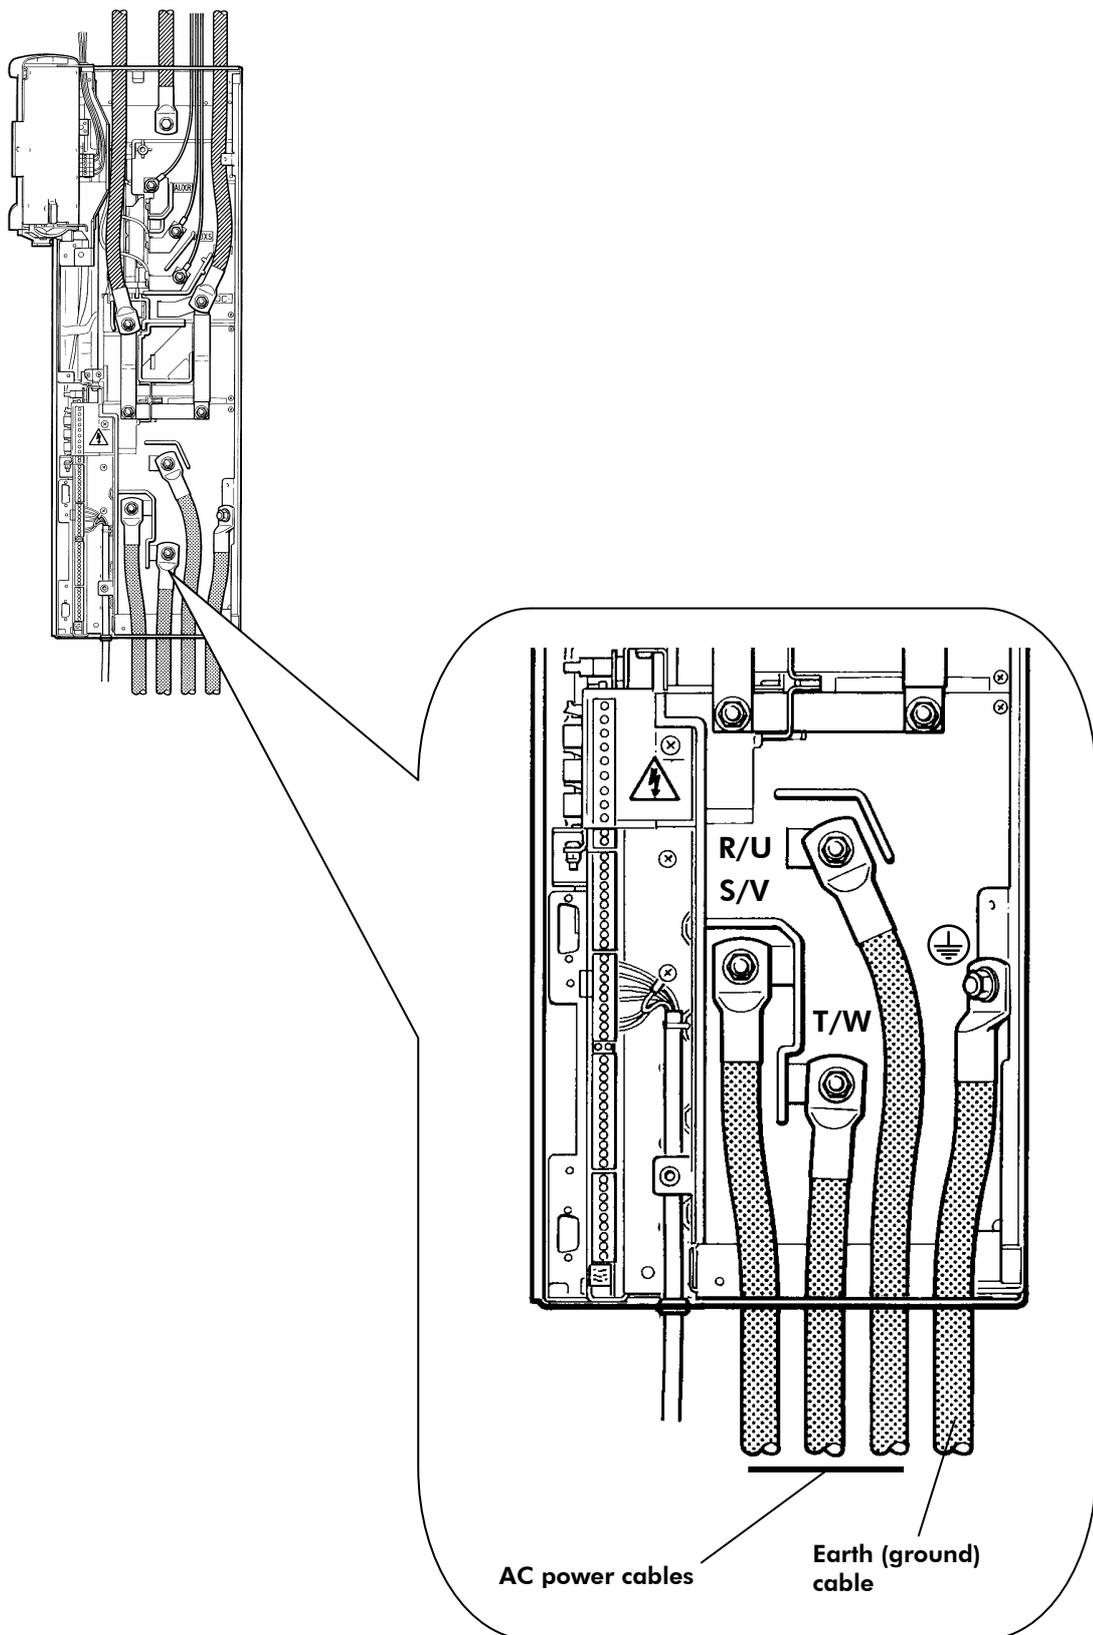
Power connections to frame sizes 3 and 4 (frame size 4 shown)
